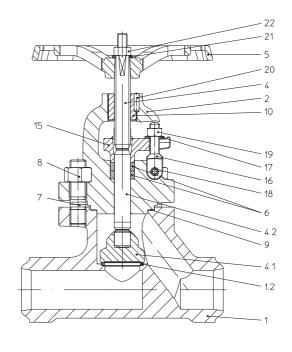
STOBU staight through with butt weld ends DN10-50
